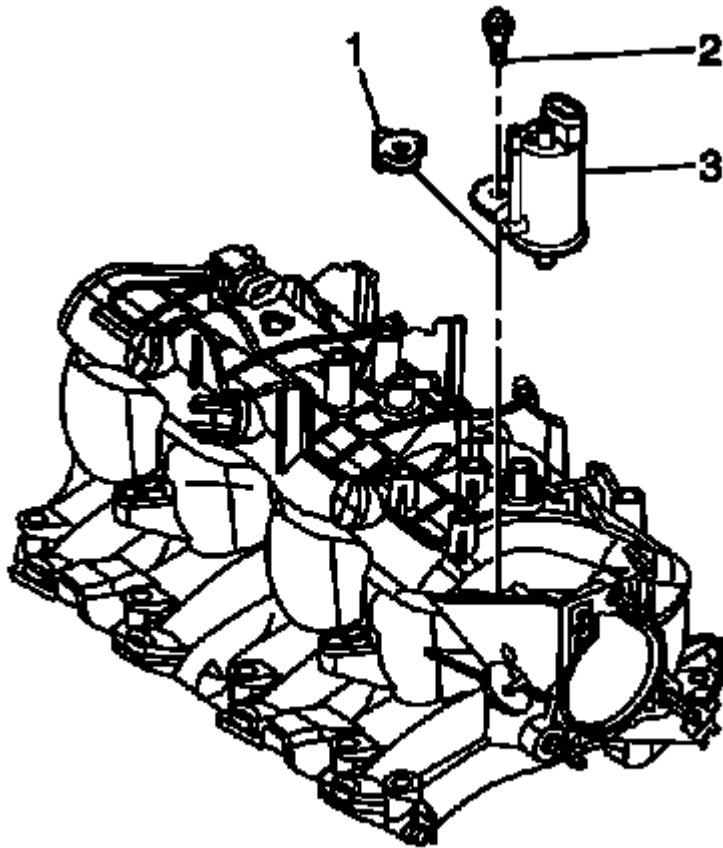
View Of EVAP Purge Solenoid Bolt, Solenoid & Isolator
